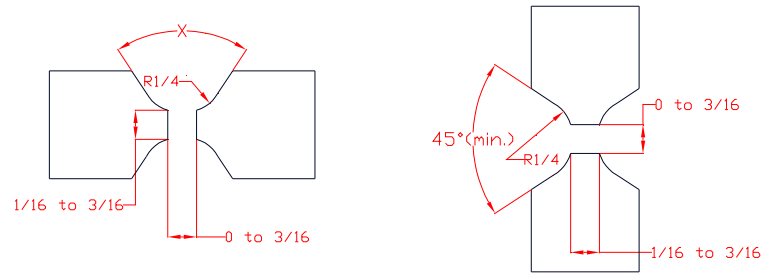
Double-J groove joints for welding both sides.
